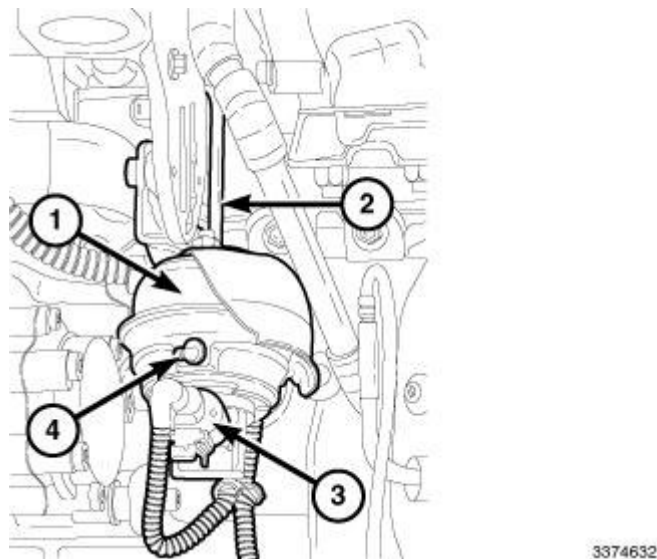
Turbocharger Actuator, Bracket, Connector & Vacuum Line
